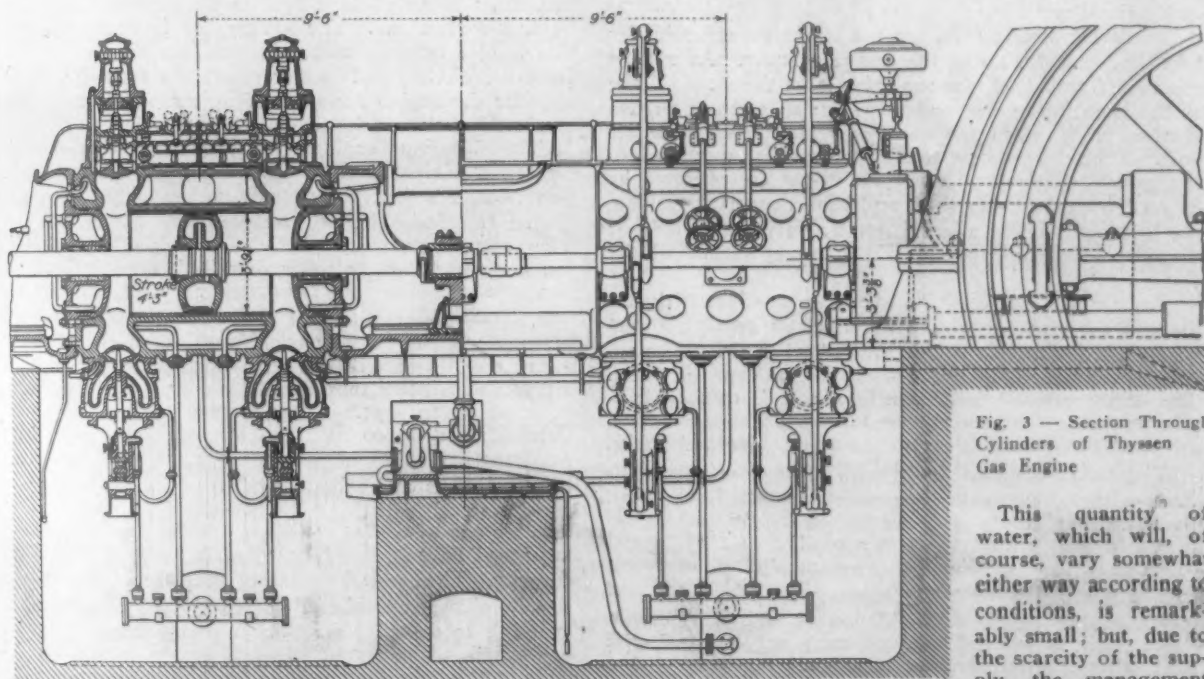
Section Through Cylinders of Thyssen Gas Engine
